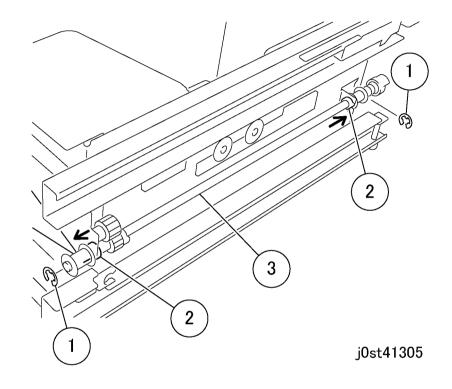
Removing the Left Shaft Assembly to remove the Tray Cable (j0st41305)
